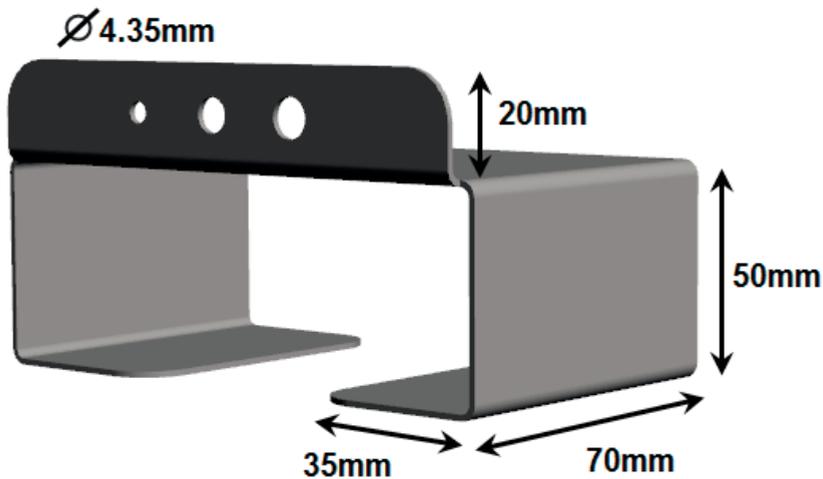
Custom-built beak trimming gauge. The smallest hole, measuring 4.35mm wide, was used in this experiment.
